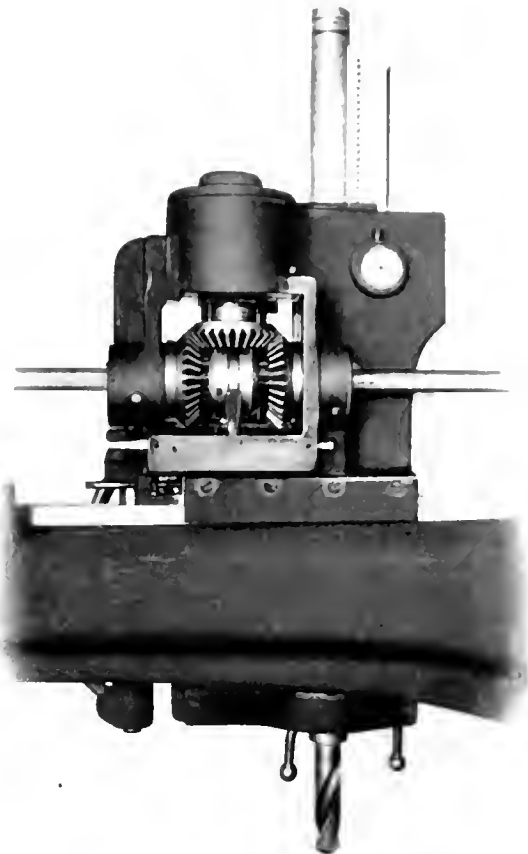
Rear View of the Head, showing Tapping Reverse for Spindle Drive on ball bearings in the slide, giving the operator an easy and quick adjustment.
